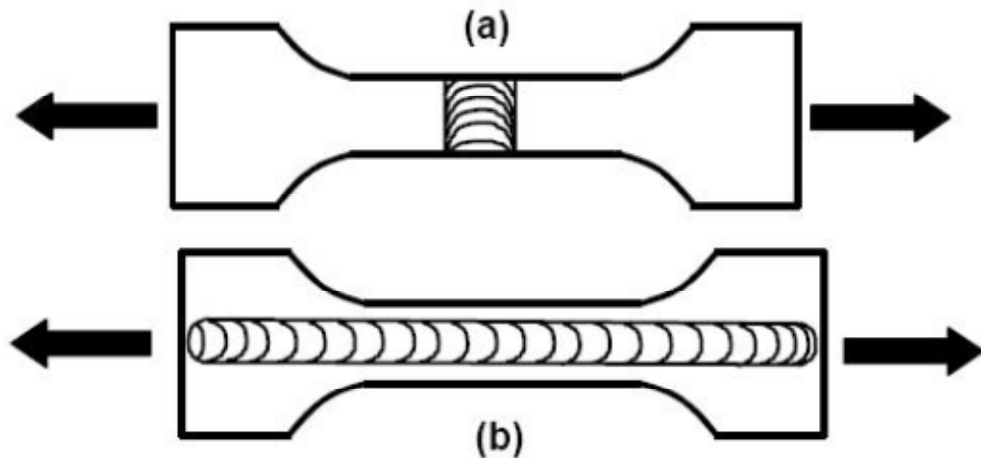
Two-dimensional rendering of tensile samples for FSW butt welds. (a) is transverse segment and (b) is longitudinal. Arrows indicate the direction of the applied load [22].
